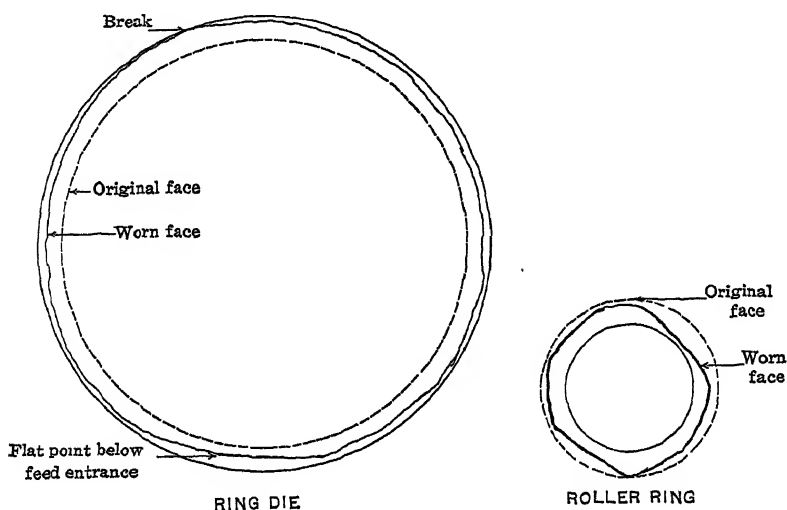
DIE AND RING OF HUNTINGTON MILL, SHOWING WEAR.
